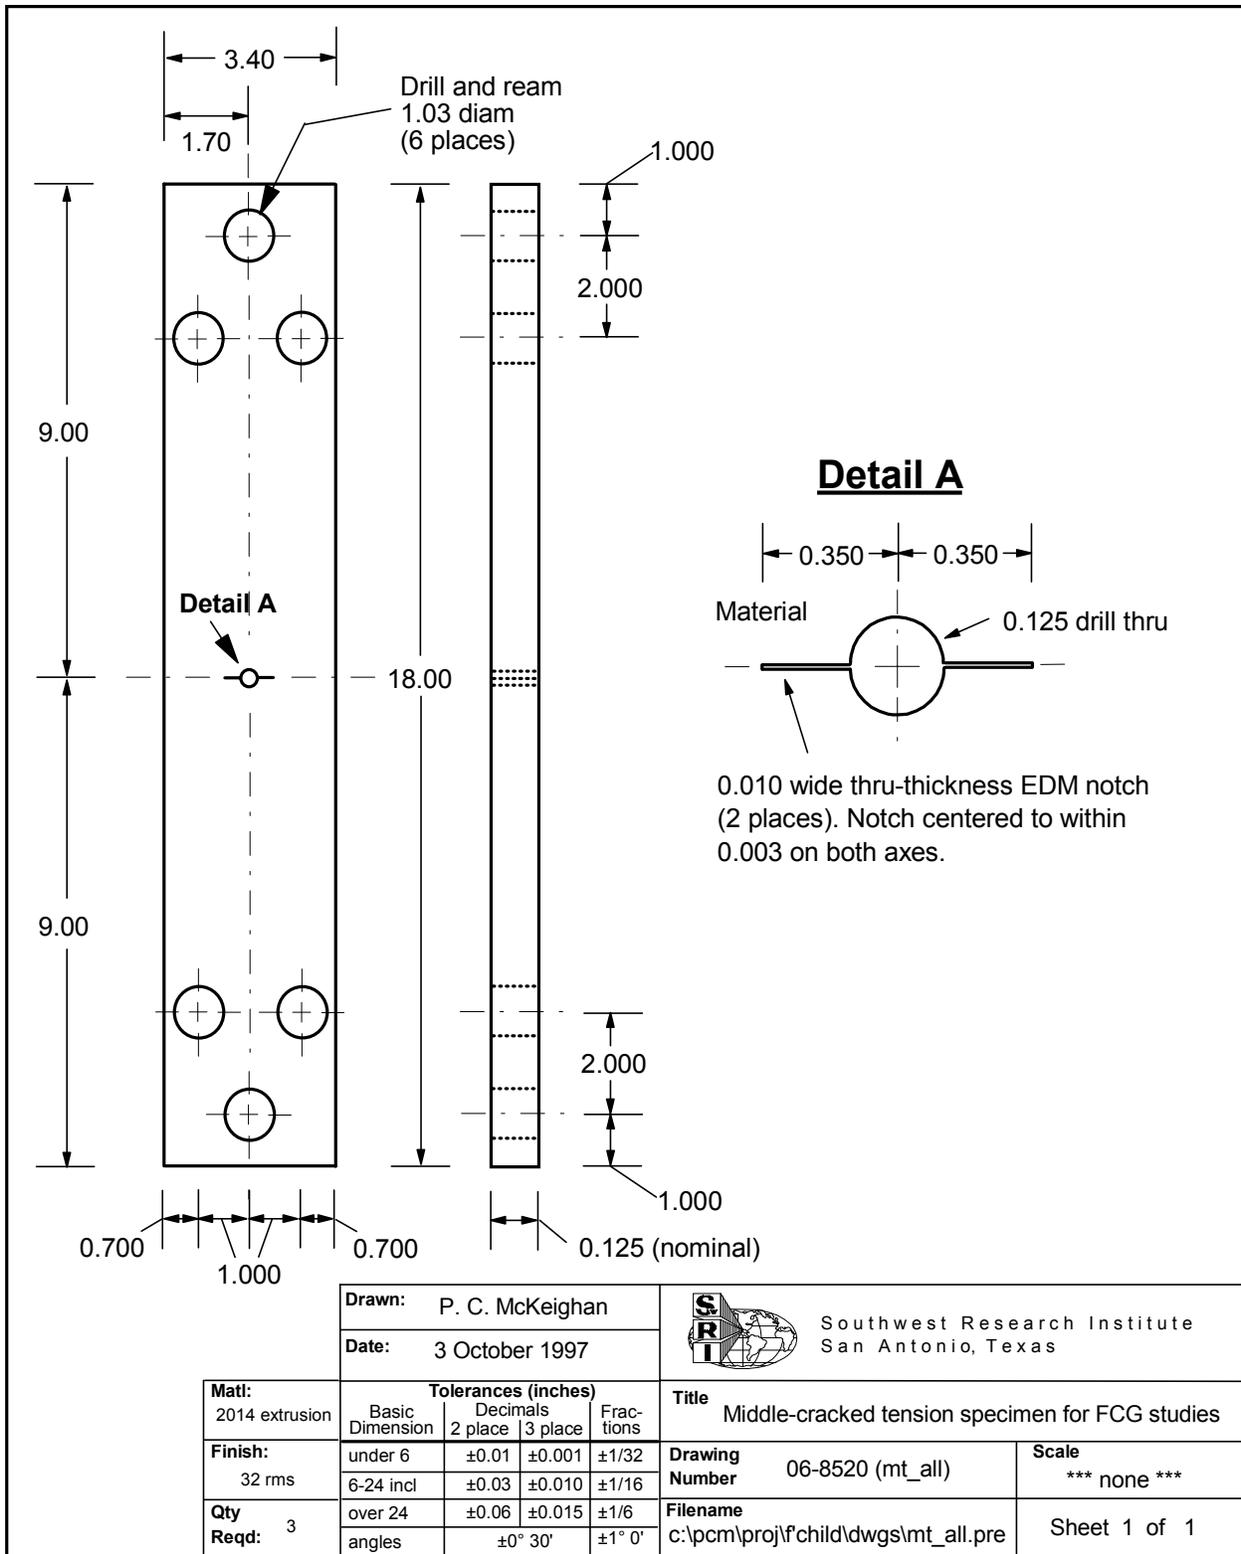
Design for the Middle Crack Tension Specimen for Fatigue Crack Growth Studies
